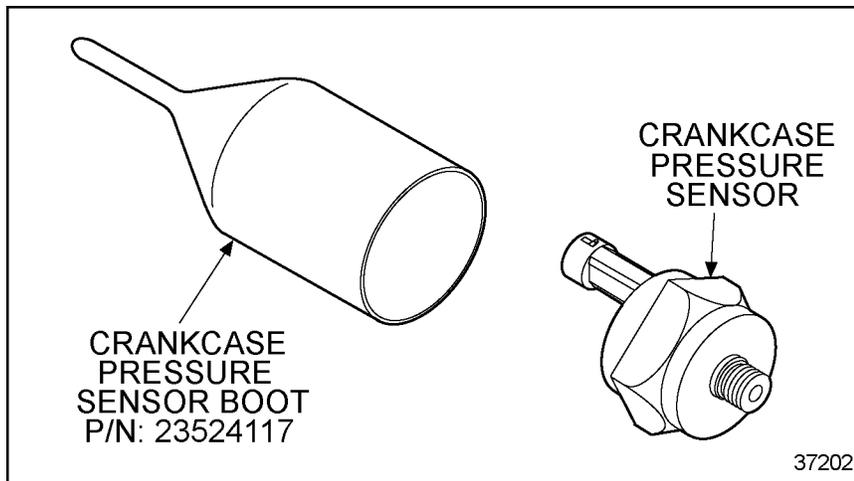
Crankcase Pressure Sensor - Series 4000
